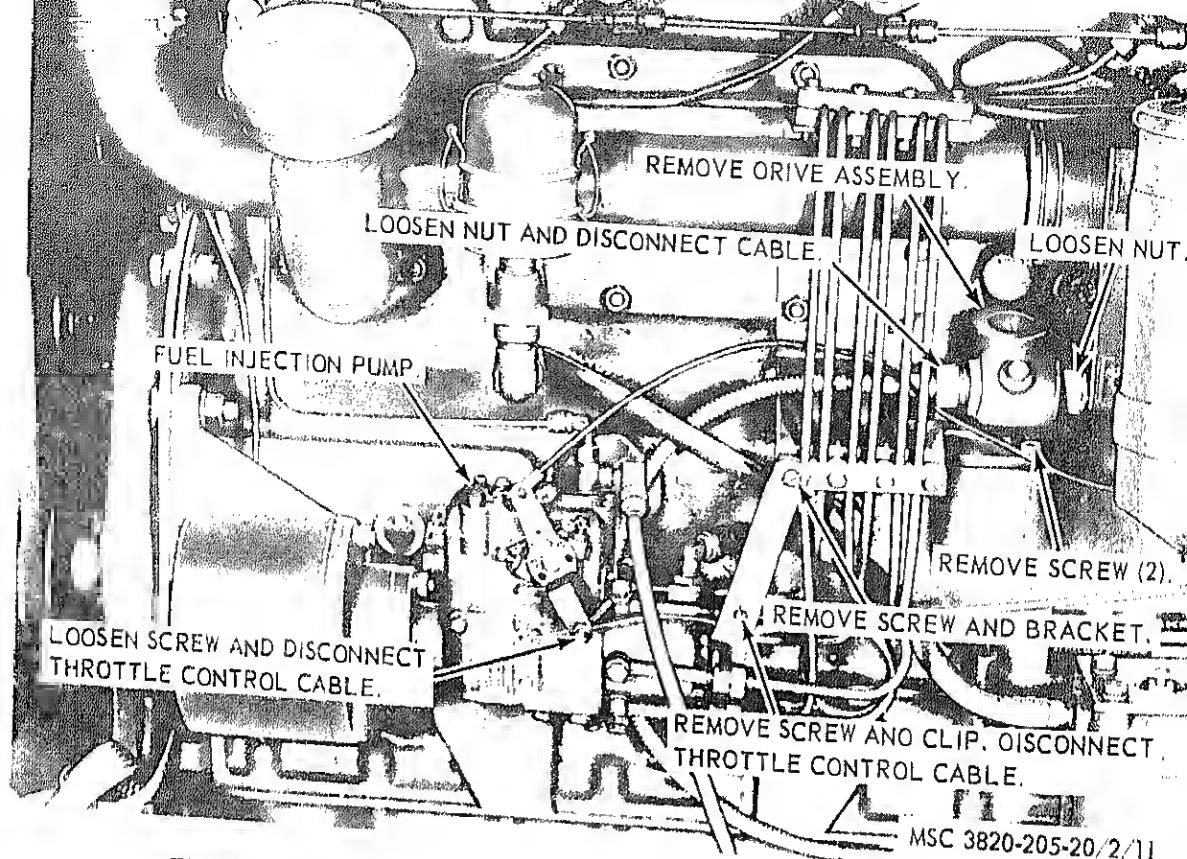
Throttle control cables and tachometer drive, removal and installation.
